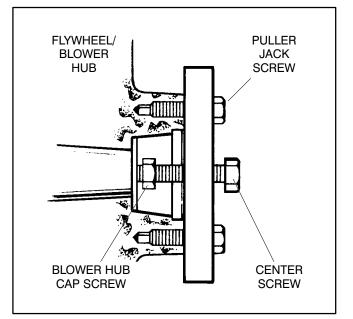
FLYWHEEL/BLOWER HUB REMOVAL
